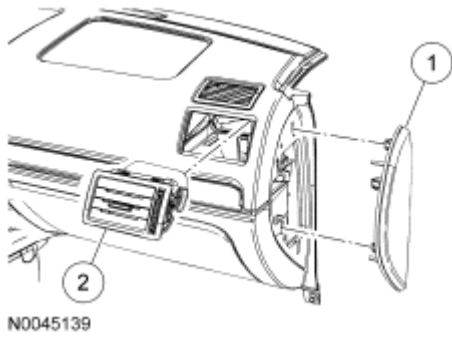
Exploded View Of Register - Driver and Passenger Side, Fusion/Milan
